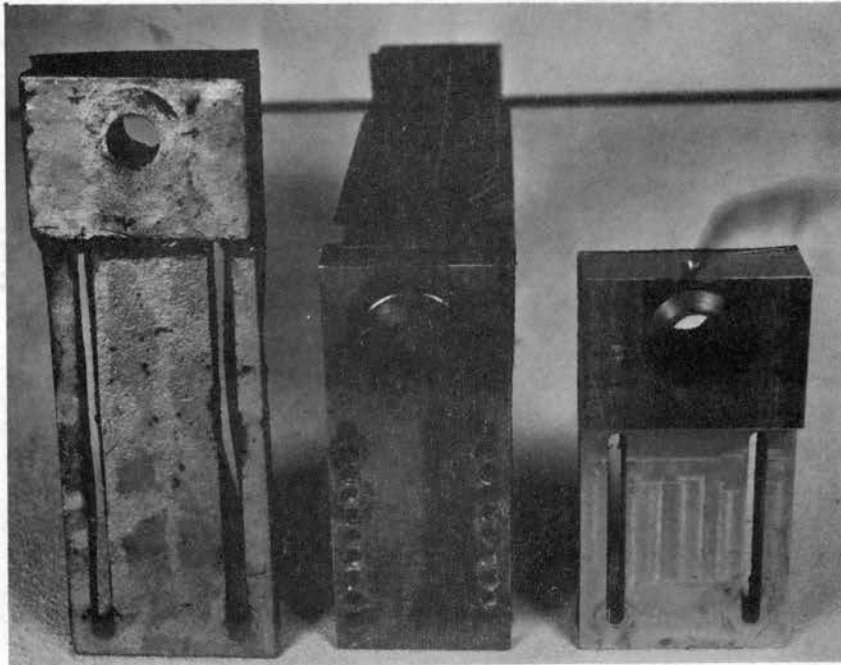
End View of Rotor Aerator Shaft Support Assembly; Both a Slot and Series of Drilled Holes Were Used for Shaft Height Position Control.
